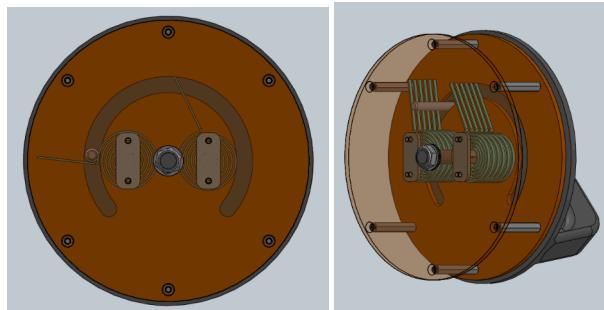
Back and perspective views of the resistance puck with the clock springs (light blue) engaged
